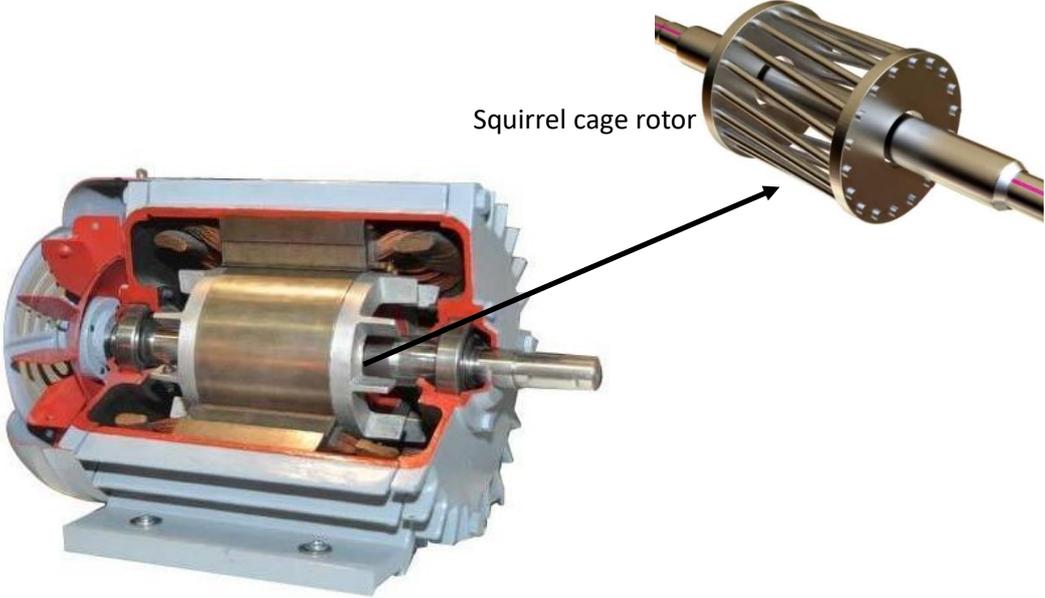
Schematic view of induction generator with Squirrel cage rotor.
